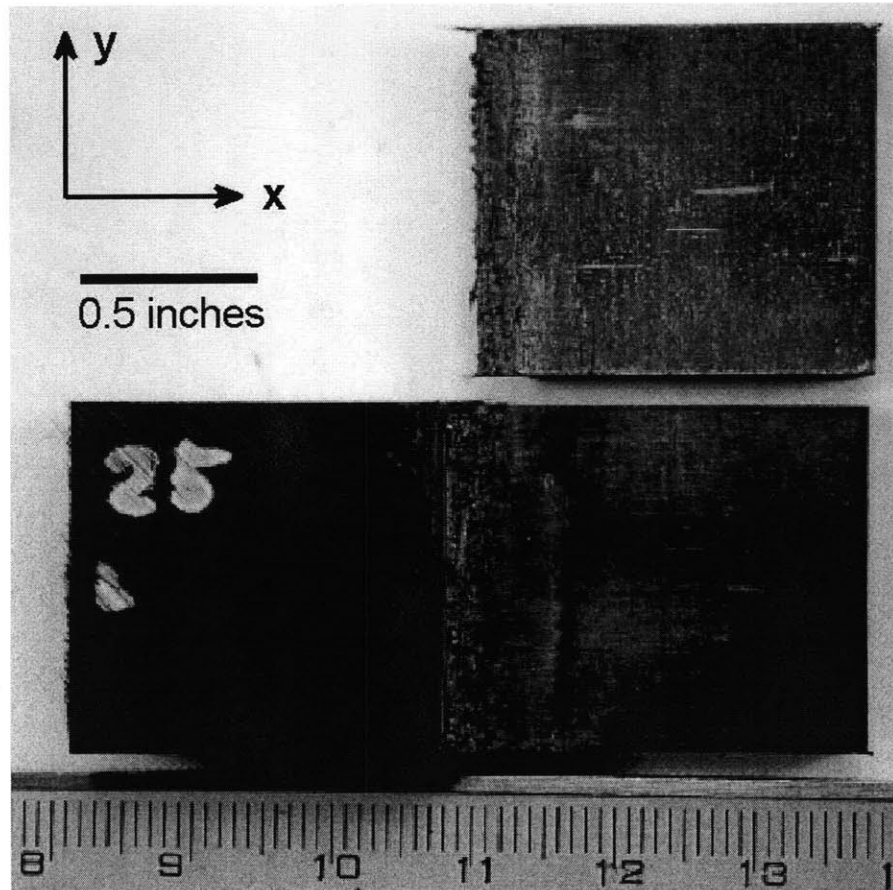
Photographs of $[\pm 45/90/0]_{10S}$ Specimen 5, from previous work [34], tested to failure in “two-dimensional loading”, shown via (*top*) side view, and (*bottom*) top view with delamination surfaces exposed.
